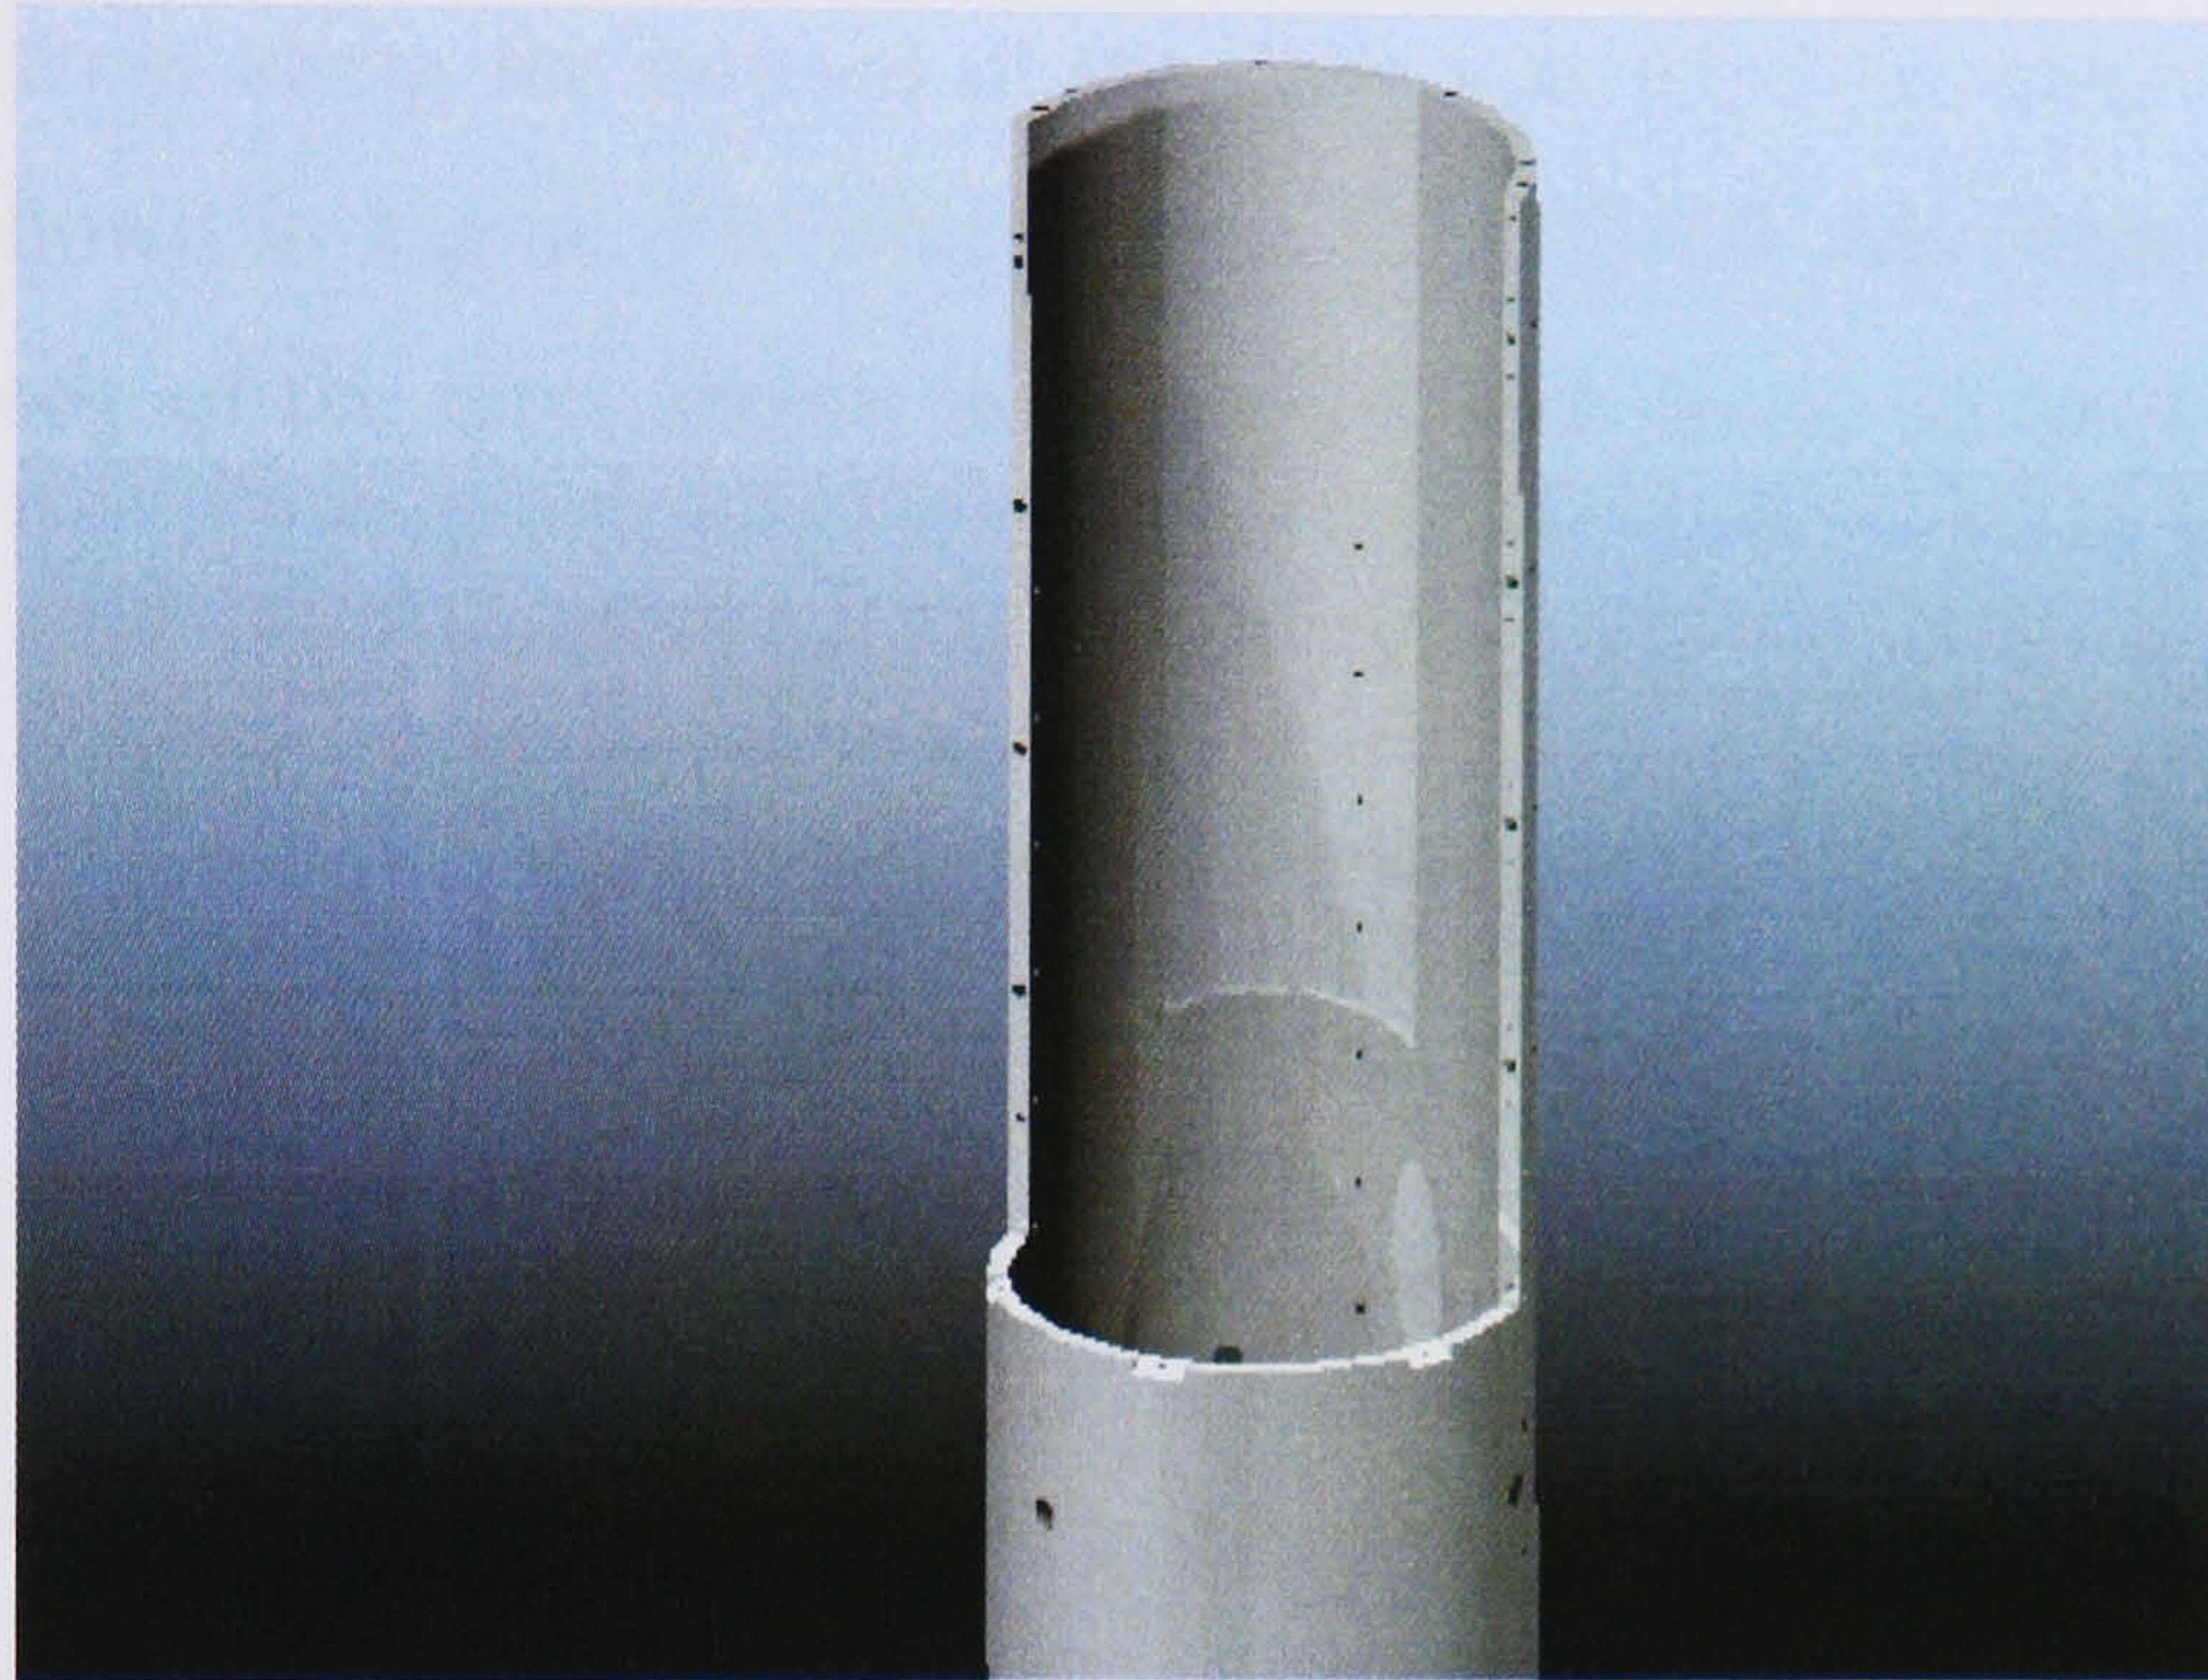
Solidworks rendering of body of support after door cut. The mating surfaces were then to be milled to give a clean surface finish and a known gap size that would be filled using brass plates.
